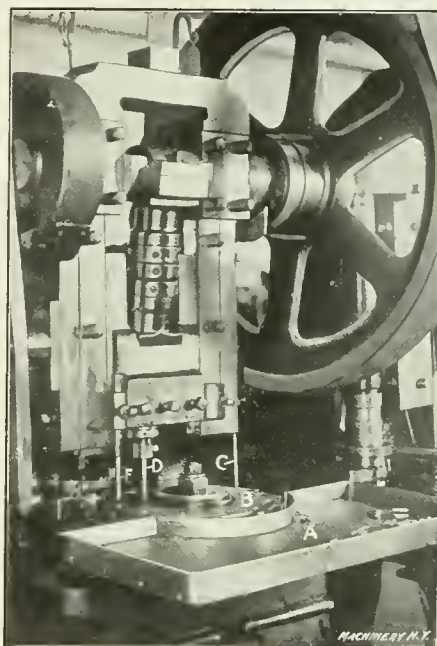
Swaging Machine for forming the Lead Filling and the Metal Case to the Desired Shape
